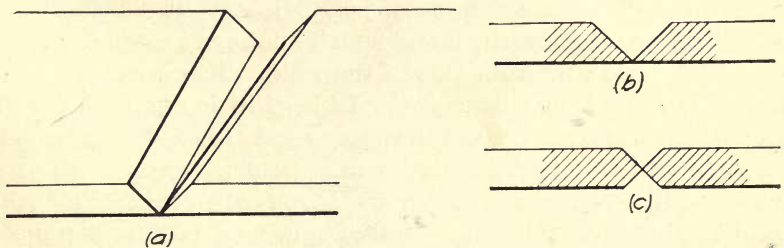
PLATES BEVELED FOR WELDING.
